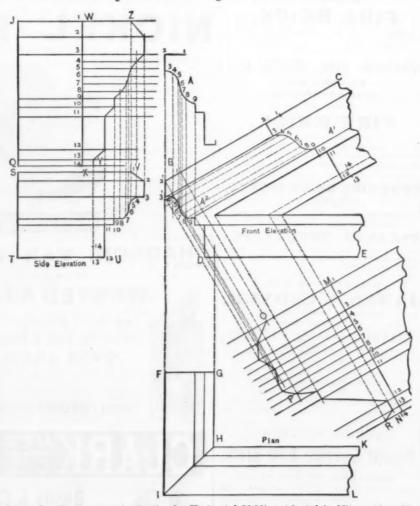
To Ascertain the Profile of a Horizontal Molding Adapted to Miter with a Given Inclined Molding at Right Angles in Plan, and the Several Miter Patterns Involved.
